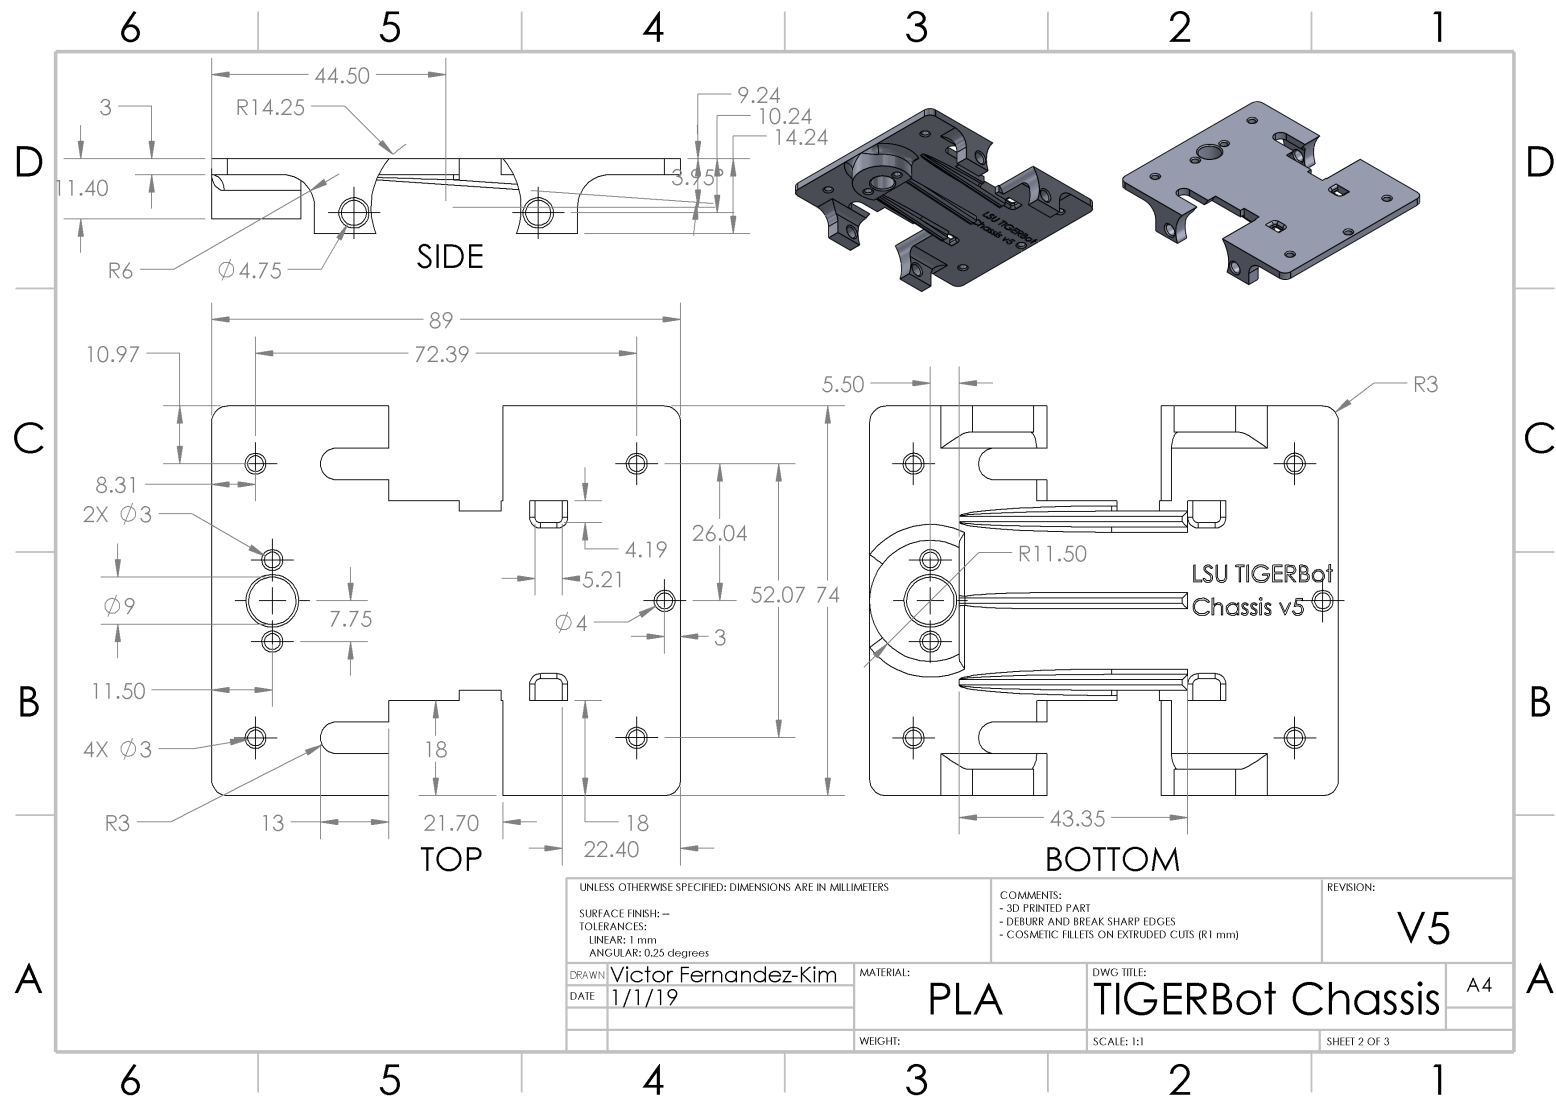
TIGERBot Chassis Mechanical Drawing.
